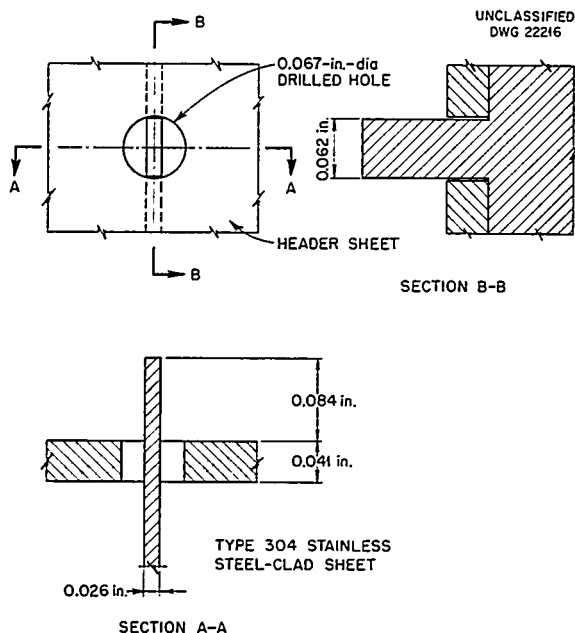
Assembly of Type 304 Stainless Steel Components Prior to Inert-Arc Plug Welding.
